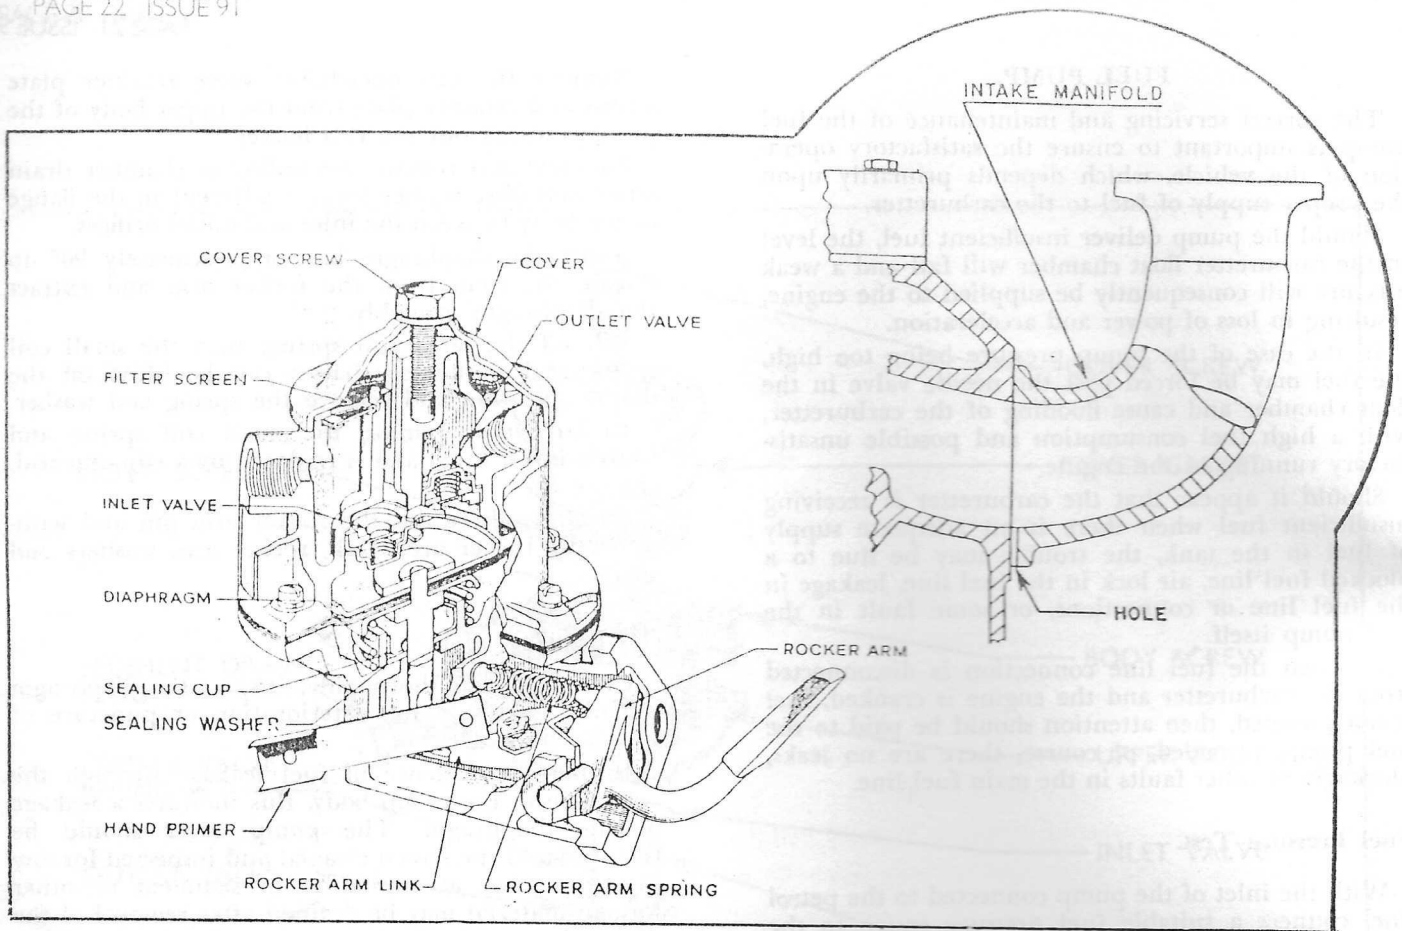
The fuel pump sectioned, left. Above, the manifold drain.
